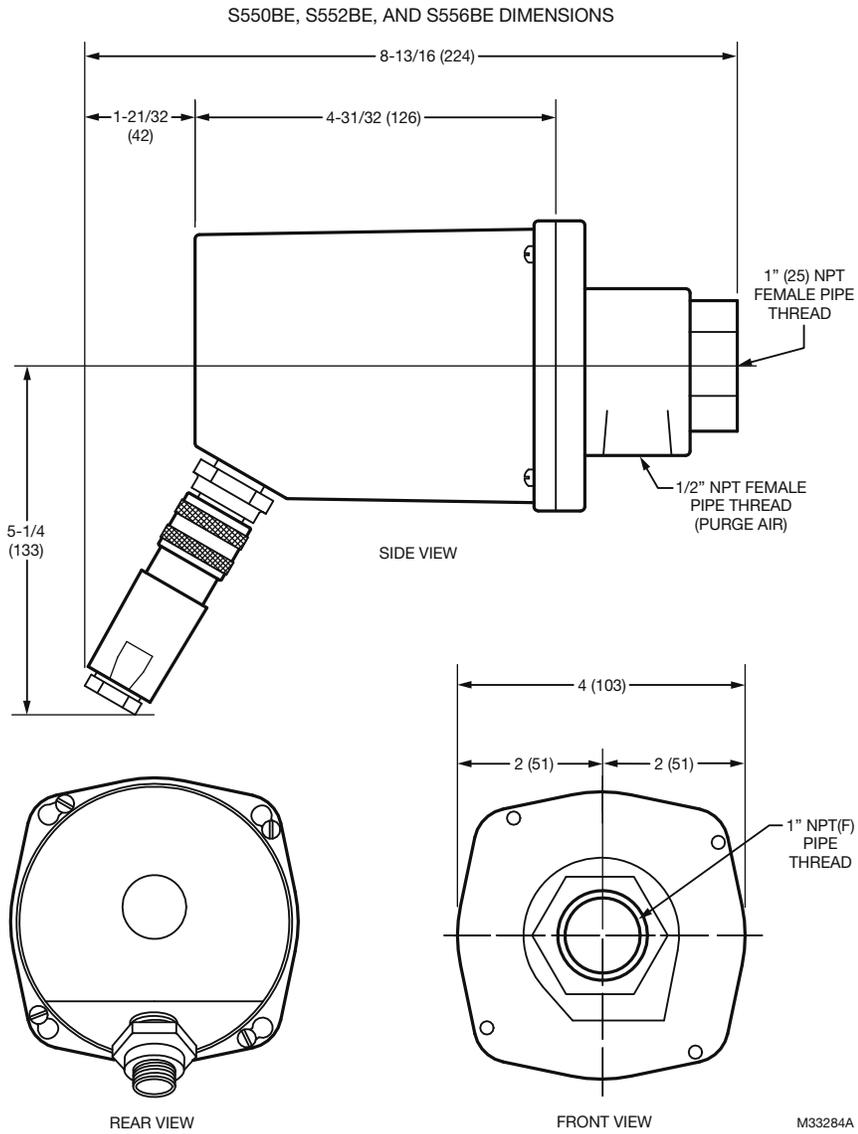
S550BE, S552BE, and S556BE dimensions in. (mm).
